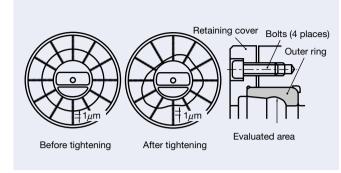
Raceway Surface Deformation Caused by Excessive Tightening
